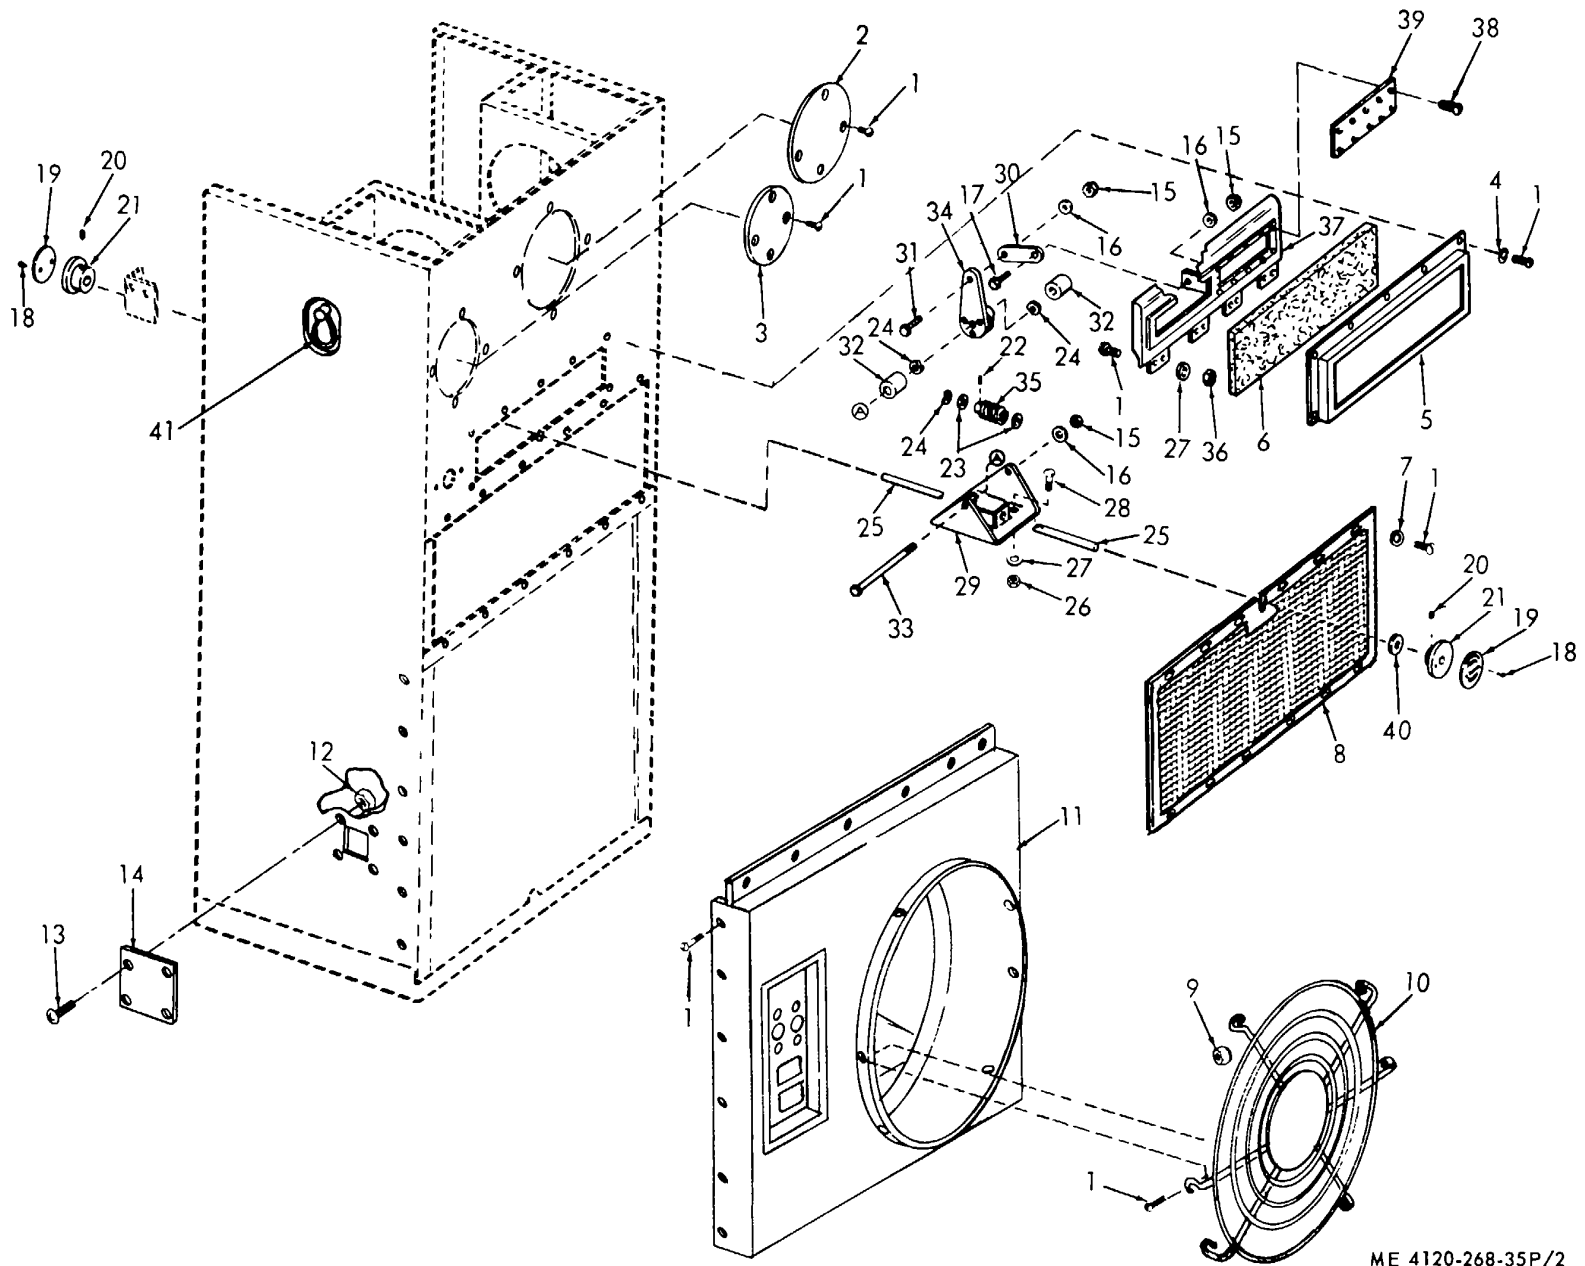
DAMPER CONTROL, FILTER, GRILLE, PANEL AND GUARD
